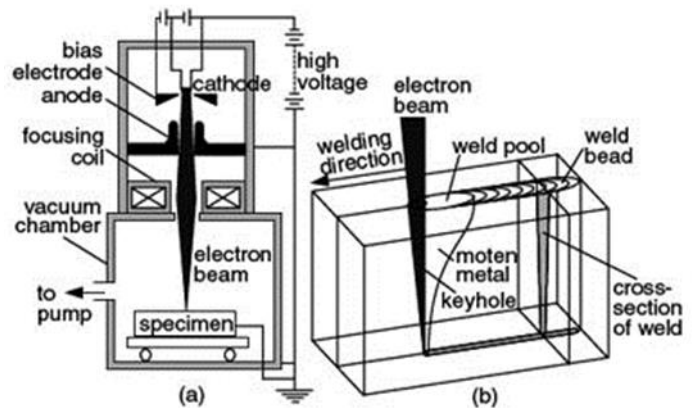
Electron beam welding: (a) process; (b) keyhole
